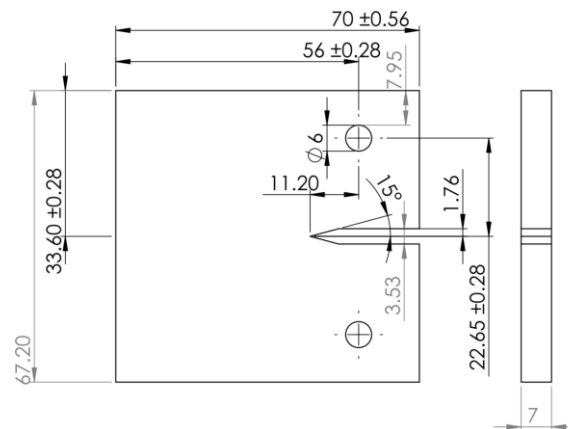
Dimension for the specimen in AISI 316L. The unit of measure is [mm]
